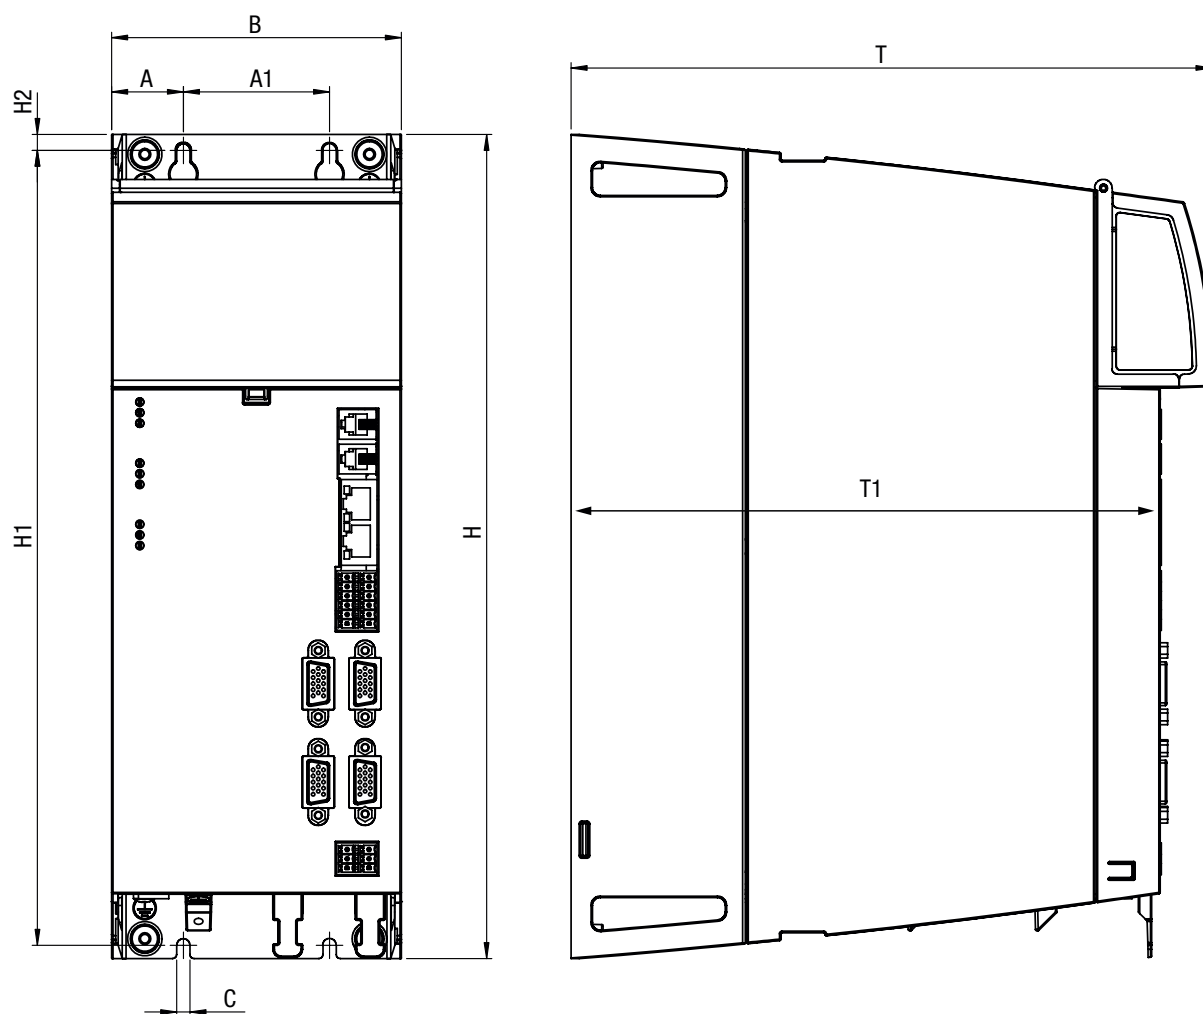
Dimensional drawing JM-3000 servo amplifier BG2 (dimensions see Table 2.1)
